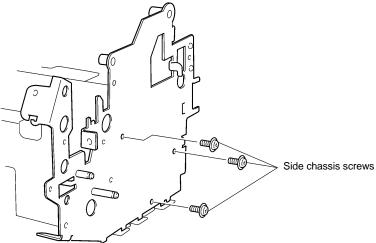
Removing the Left and Right Sides of the Chassis
